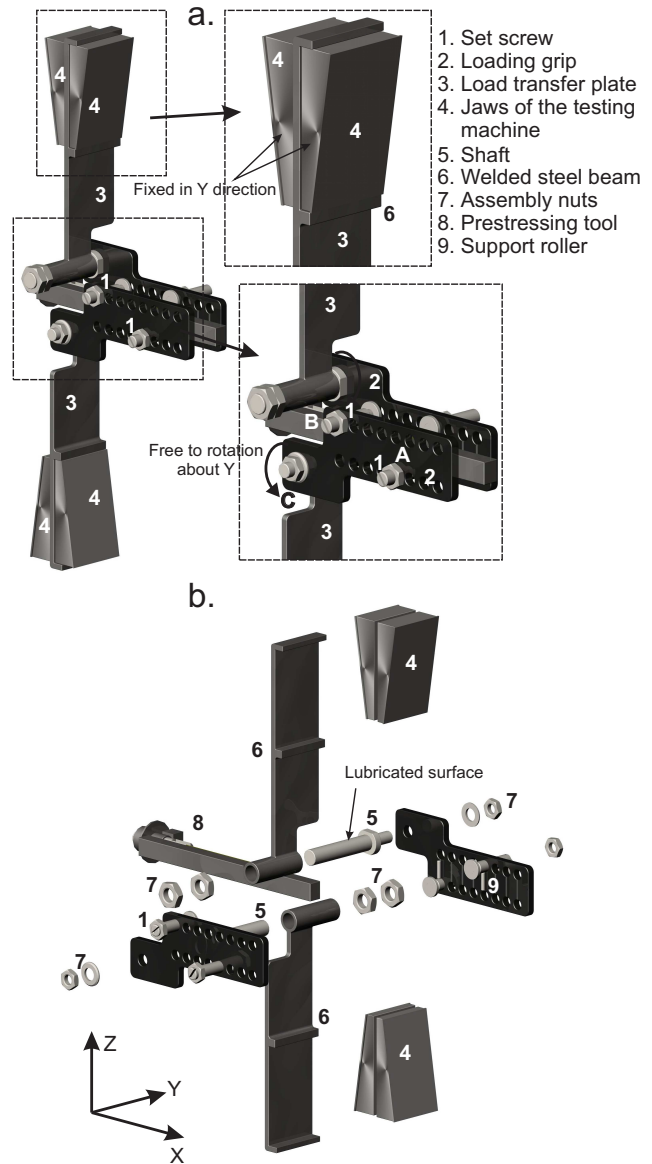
The 3D views of the  $PSCB_{II/III}$  specimen, assembled state (a), exploded view (b).
